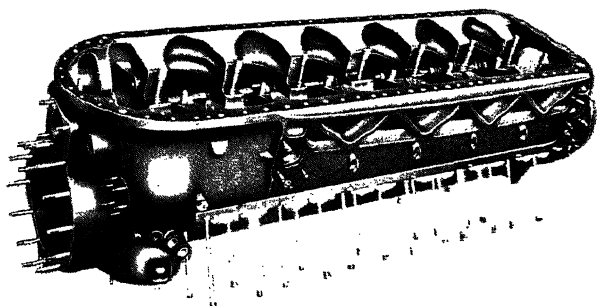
Crankcase unit of the "Gipsy Twelve" inverted Vee-type engine. Showing cover and cylinder joints, etc.
